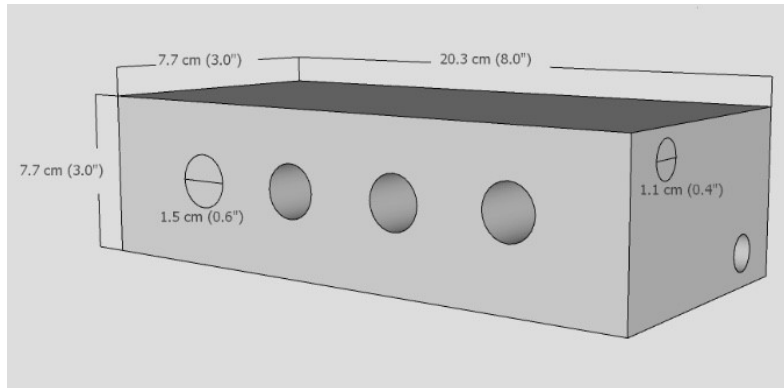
S3. Dimensions and machining specifications of aluminum block oven.
